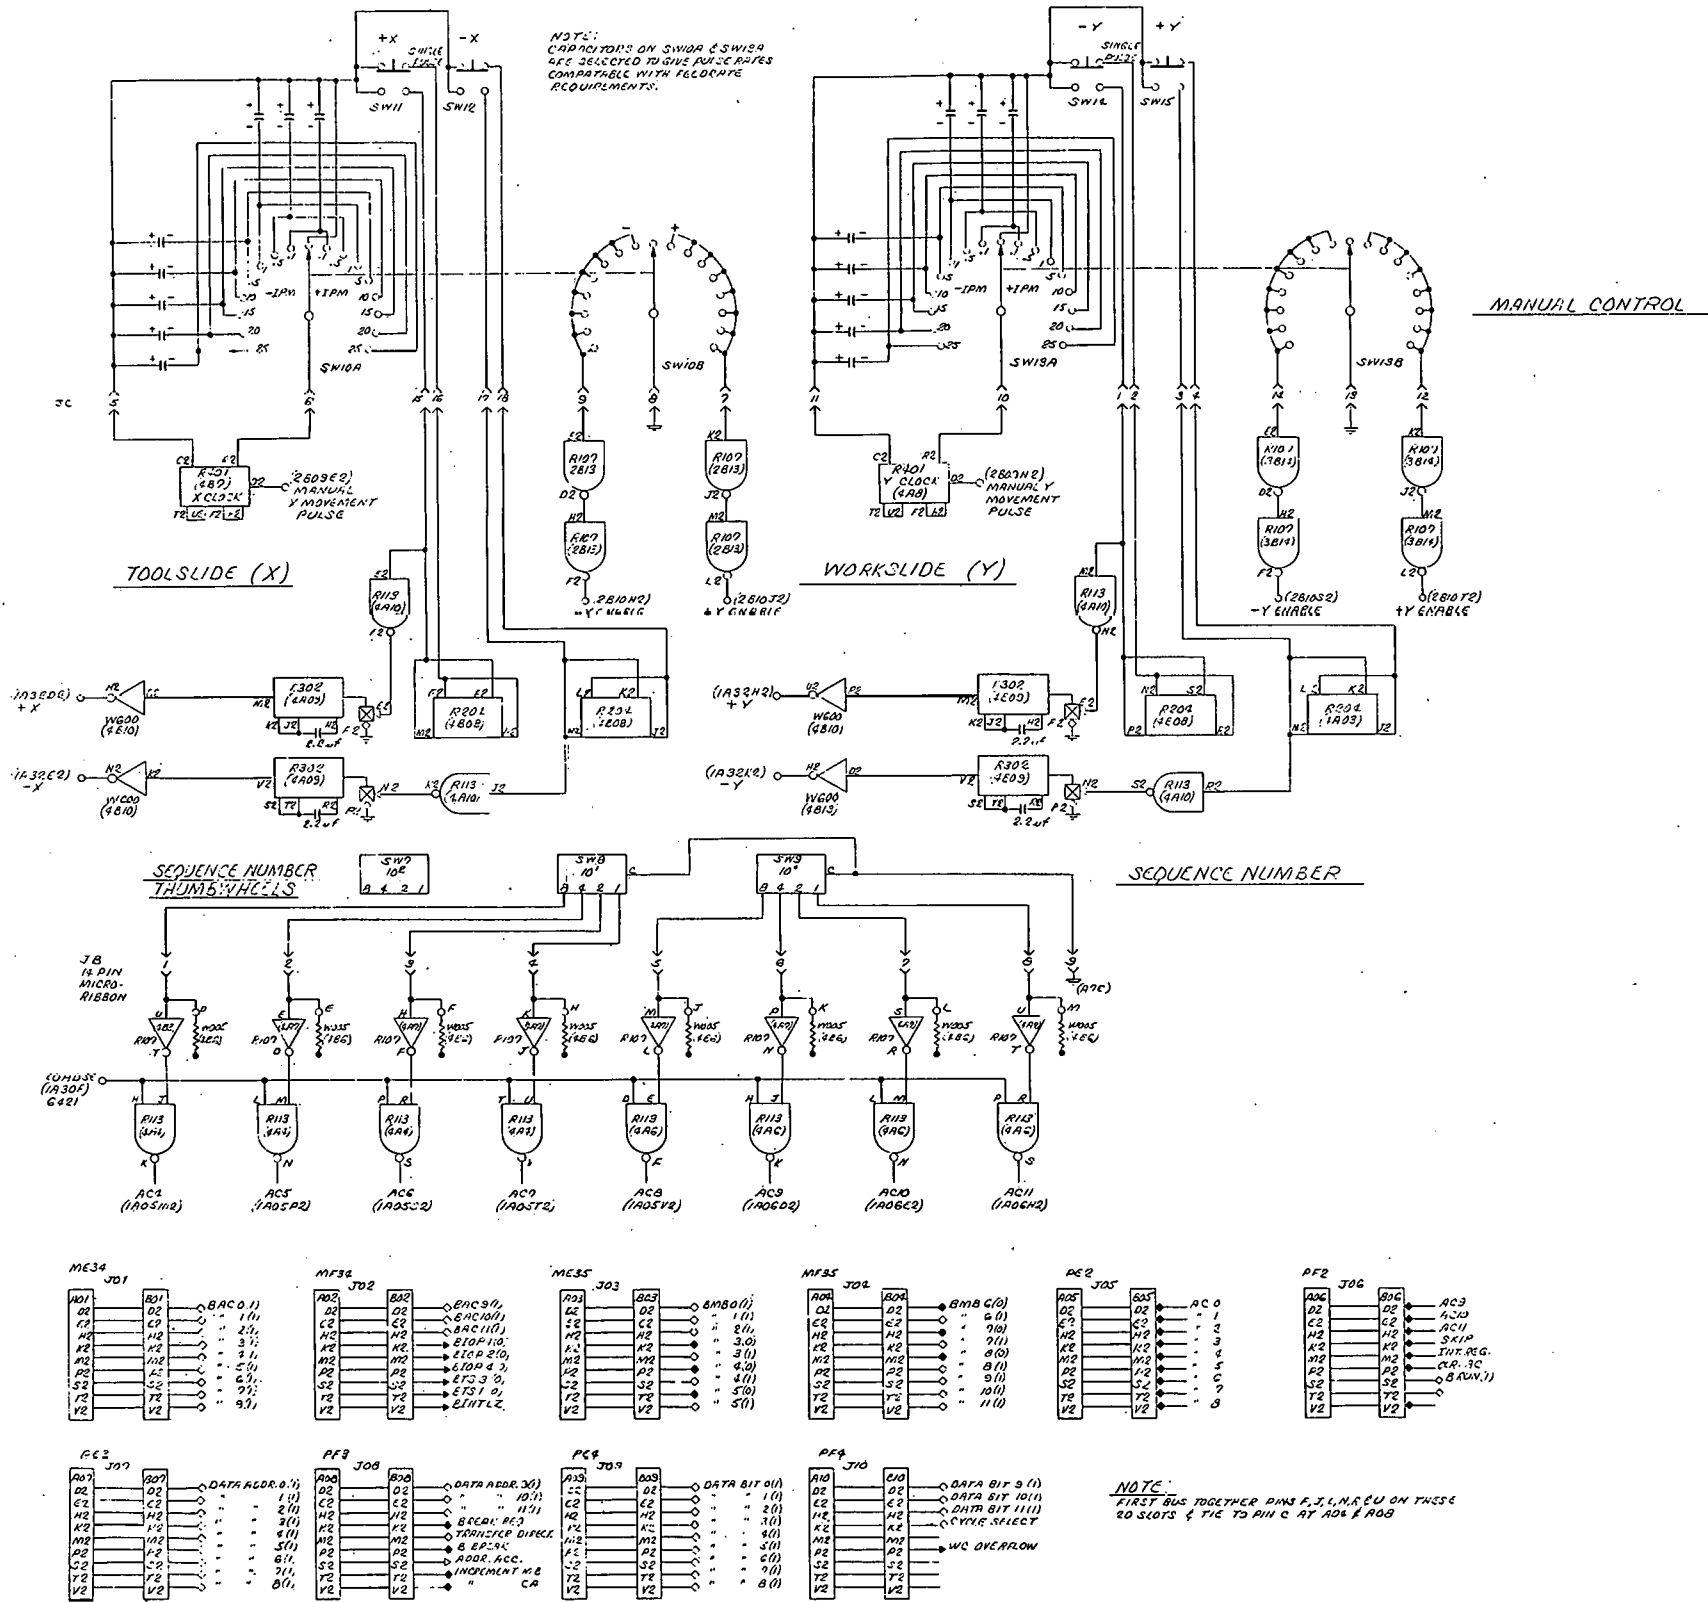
MACHINE TOOL CONTROL. (Computer Input-Output Bus)
